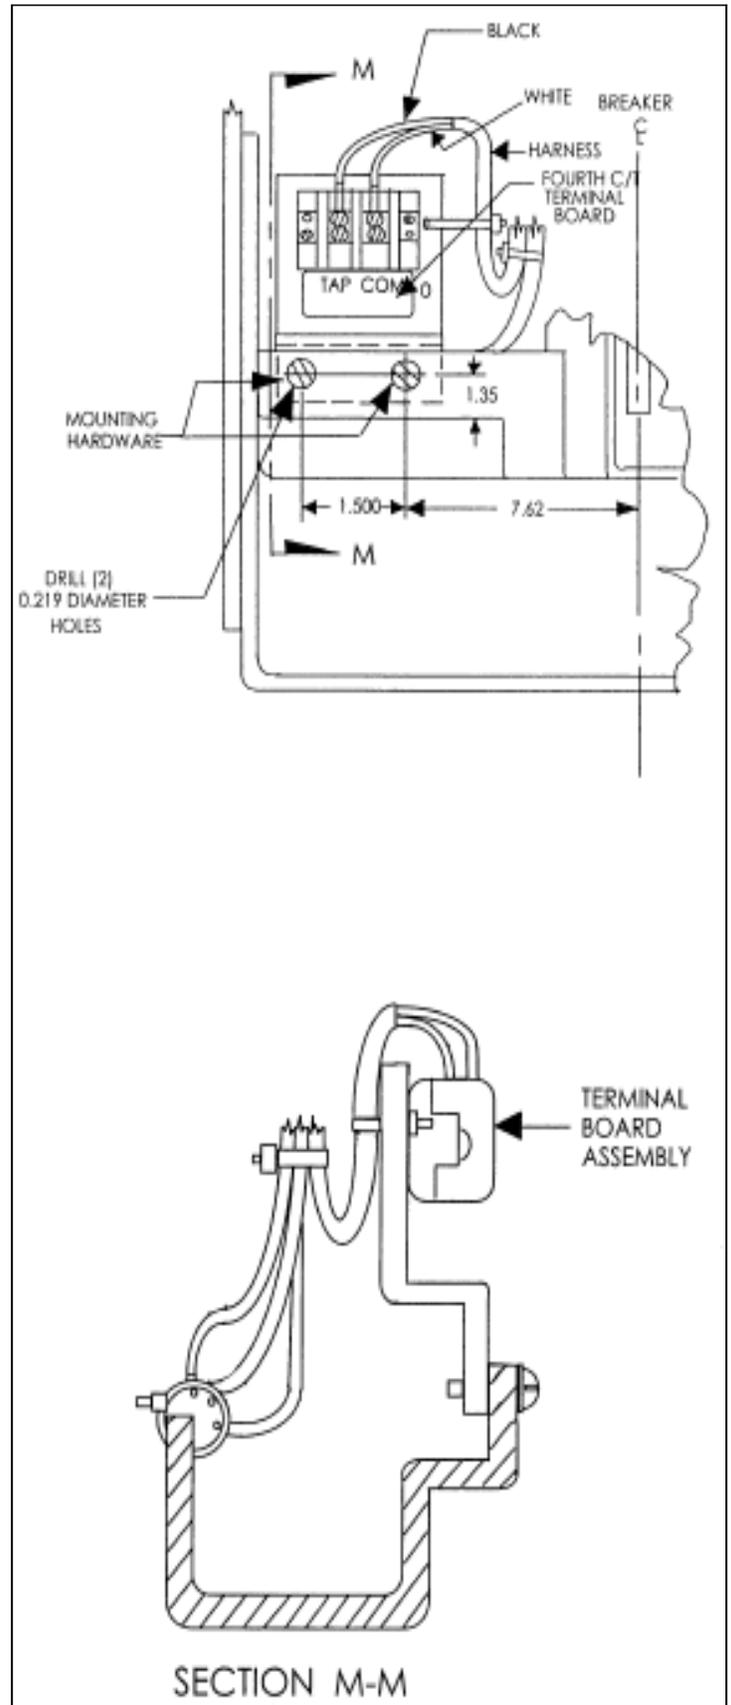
4th Wire Terminal Board Installed Types AK-50, AKS-50 Stationary
